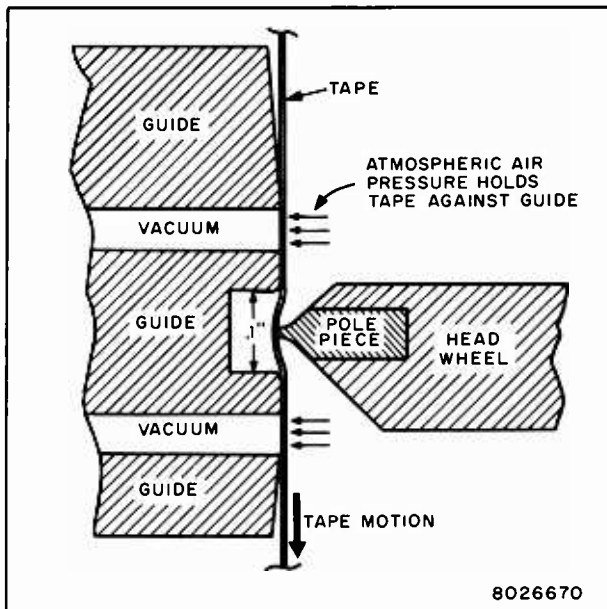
Cross-Sectional View of Vacuum Guide and Headwheel
